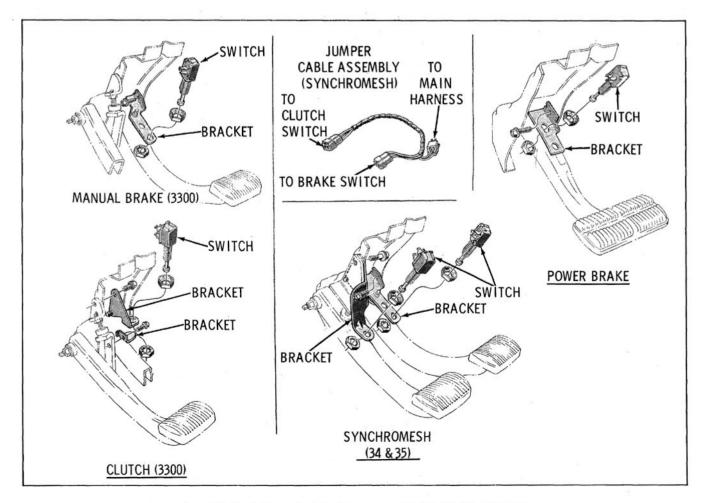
Release Switch Adjustment (33, 34, 35, 36, 38 & 39)
